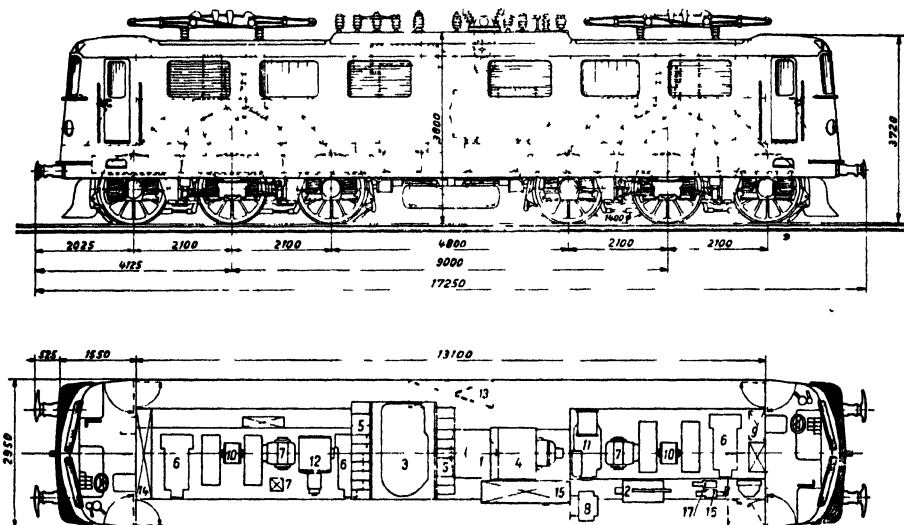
GENERAL ARRANGEMENT AND LAYOUT OF EQUIPMENT
